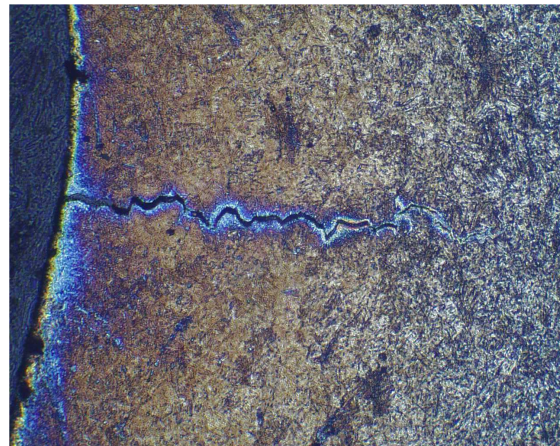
Tooth – sample D. Surface layer, crack through the surface layer; magn. 500x; OM
